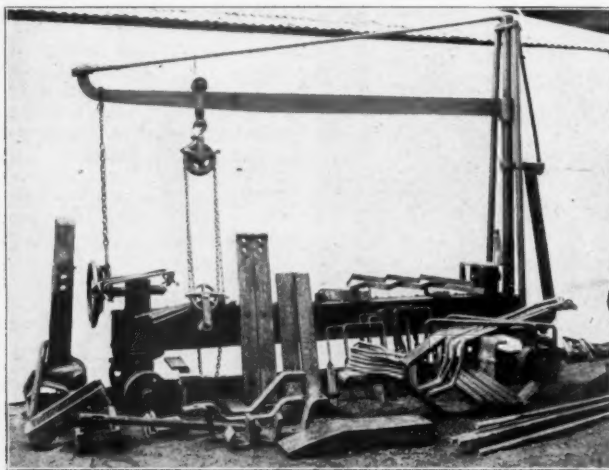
AXLE STRAIGHTENING LATHE AND SAMPLES OF BENDING.
